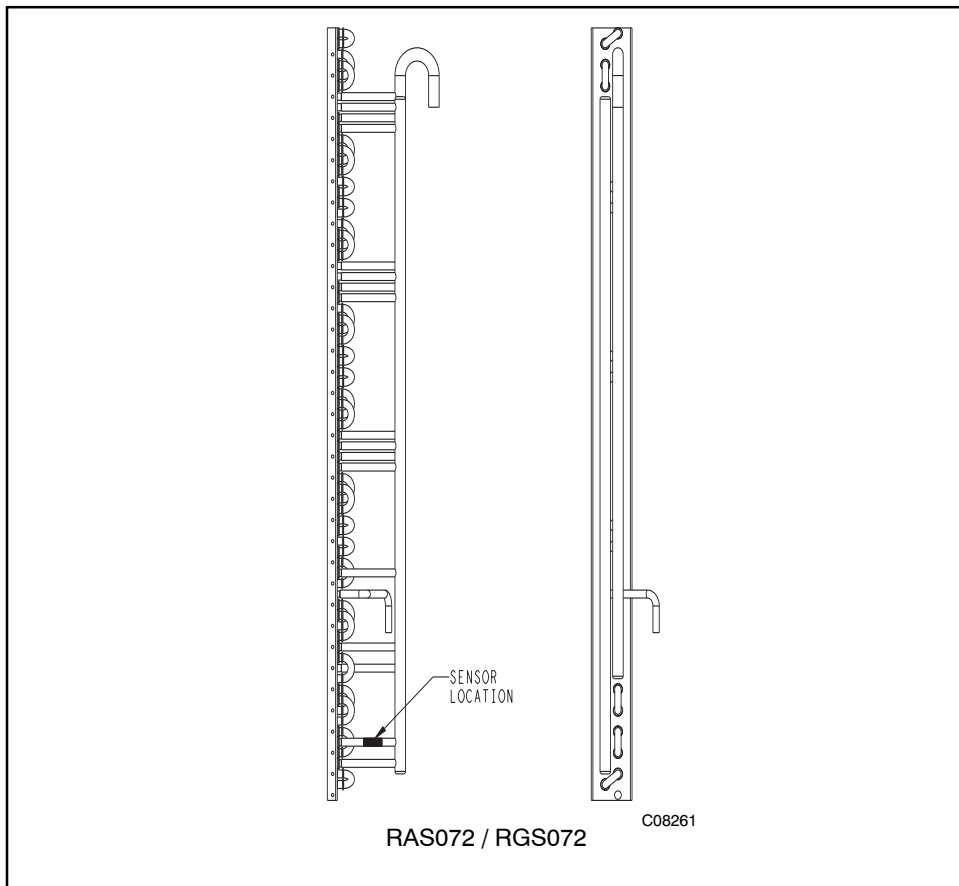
Motormaster® II Sensor Locations – 6 Ton Cooling Units
